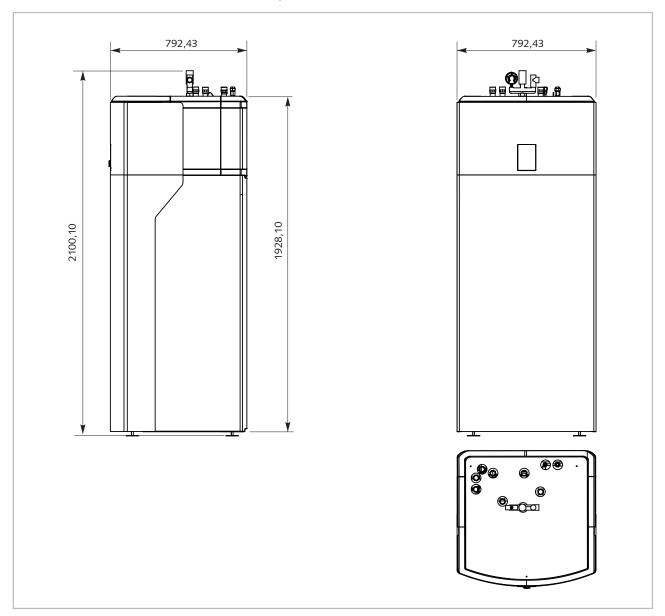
Indoor unit WKF-compact 80-170 dimensions (all dimensions in mm)
